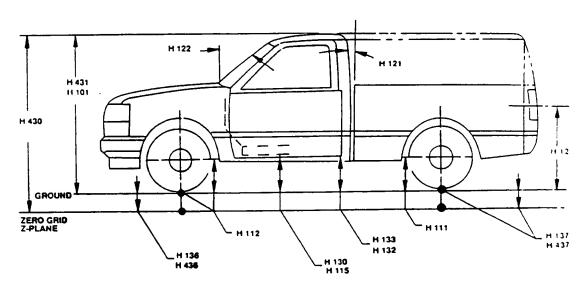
TRUCK EXTERIOR DIMENSIONS, HEIGHT
